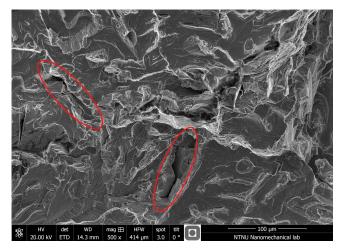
Images showing the fracture surface of the reference specimen for material B.
